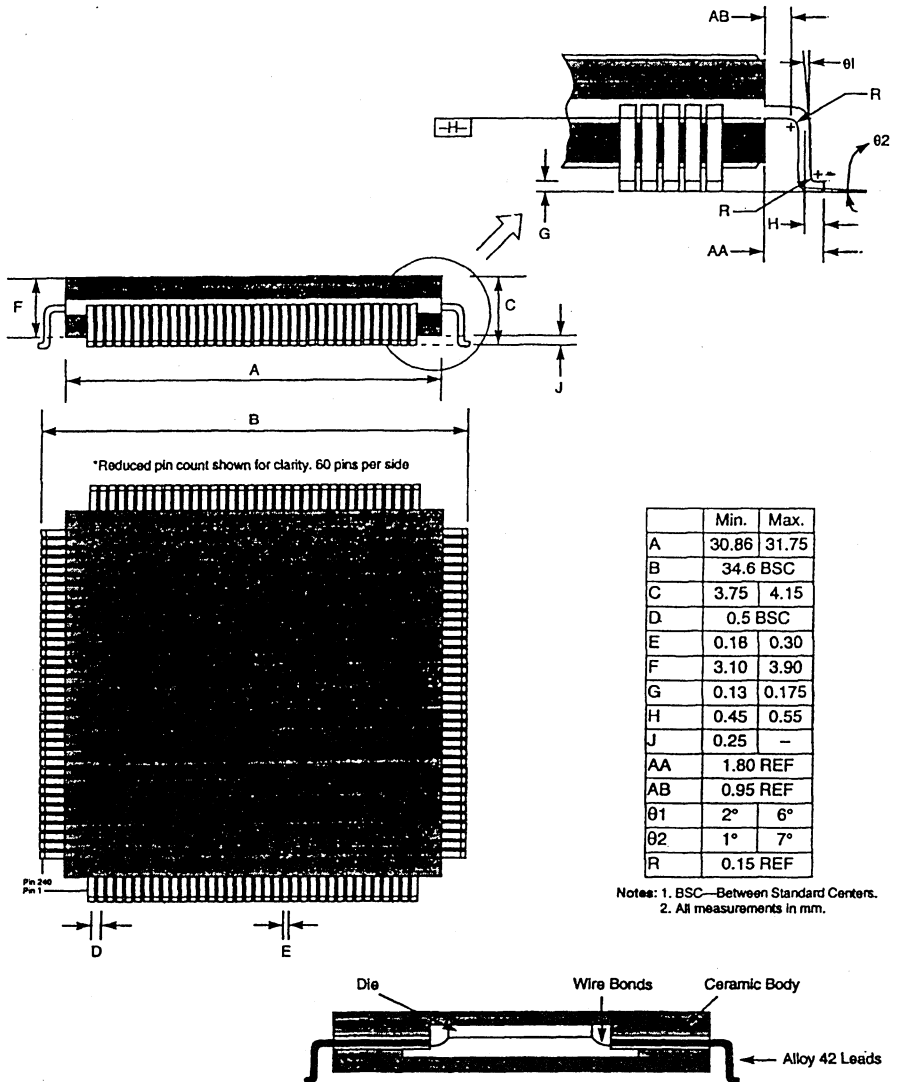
Mechanical dimensions of the Wire-bond CQFP package
